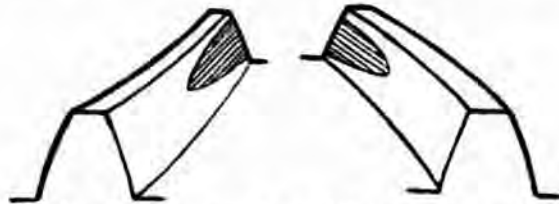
Shows the correct marking on the crown wheel teeth when the gears are tested on the bench without load. If the marking shows higher on the driving side, this can be corrected by adjusting the pinion towards the crown wheel and readjusting the crown wheel for backlash. If the marking shows high on the over-run side of the teeth, the pinion should be taken away from the crown wheel, and the backlash reduced to not less than .007 in.
